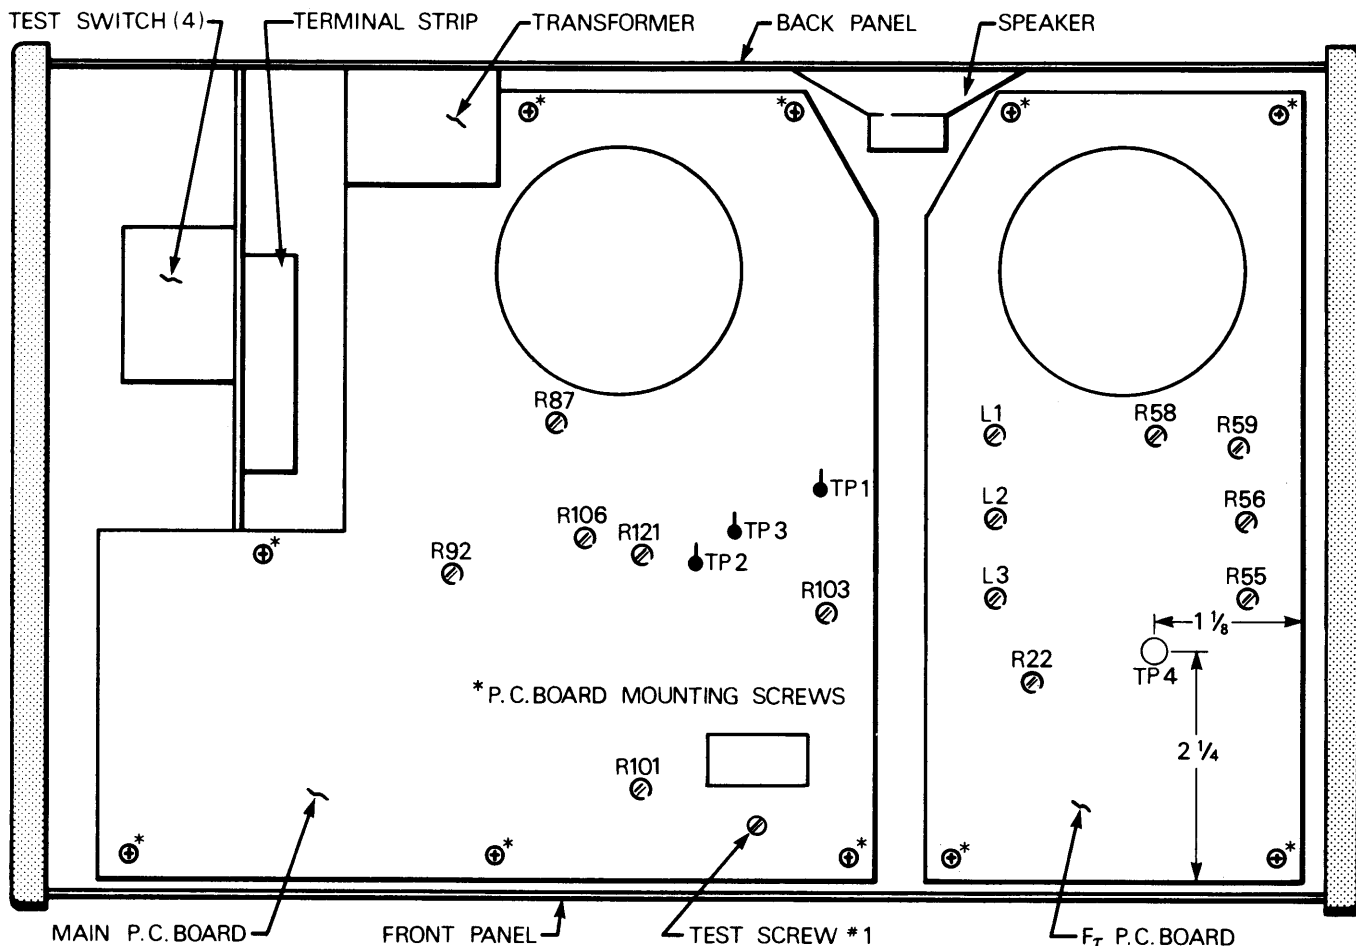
Bottom view of Model 530, with bottom panel removed.
